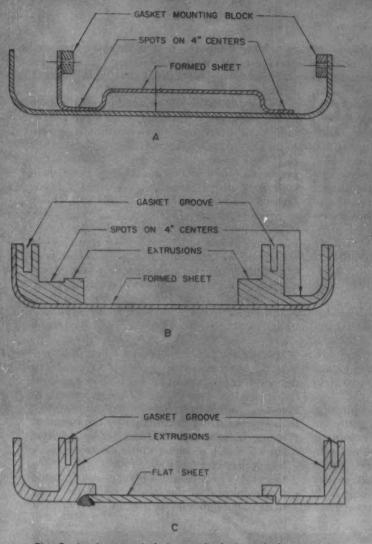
As door-panel design evolved, formed sheet-metal parts (View A) were replaced to a great extent by extruded sections covered by a formed sheet-metal skin (View B). An ultimate design (View C) uses two extrusions with a panel joined between them to form both door skin and frame.
